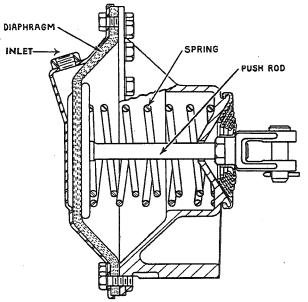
, Typical Brake Chamber (Diaphragm Type)
